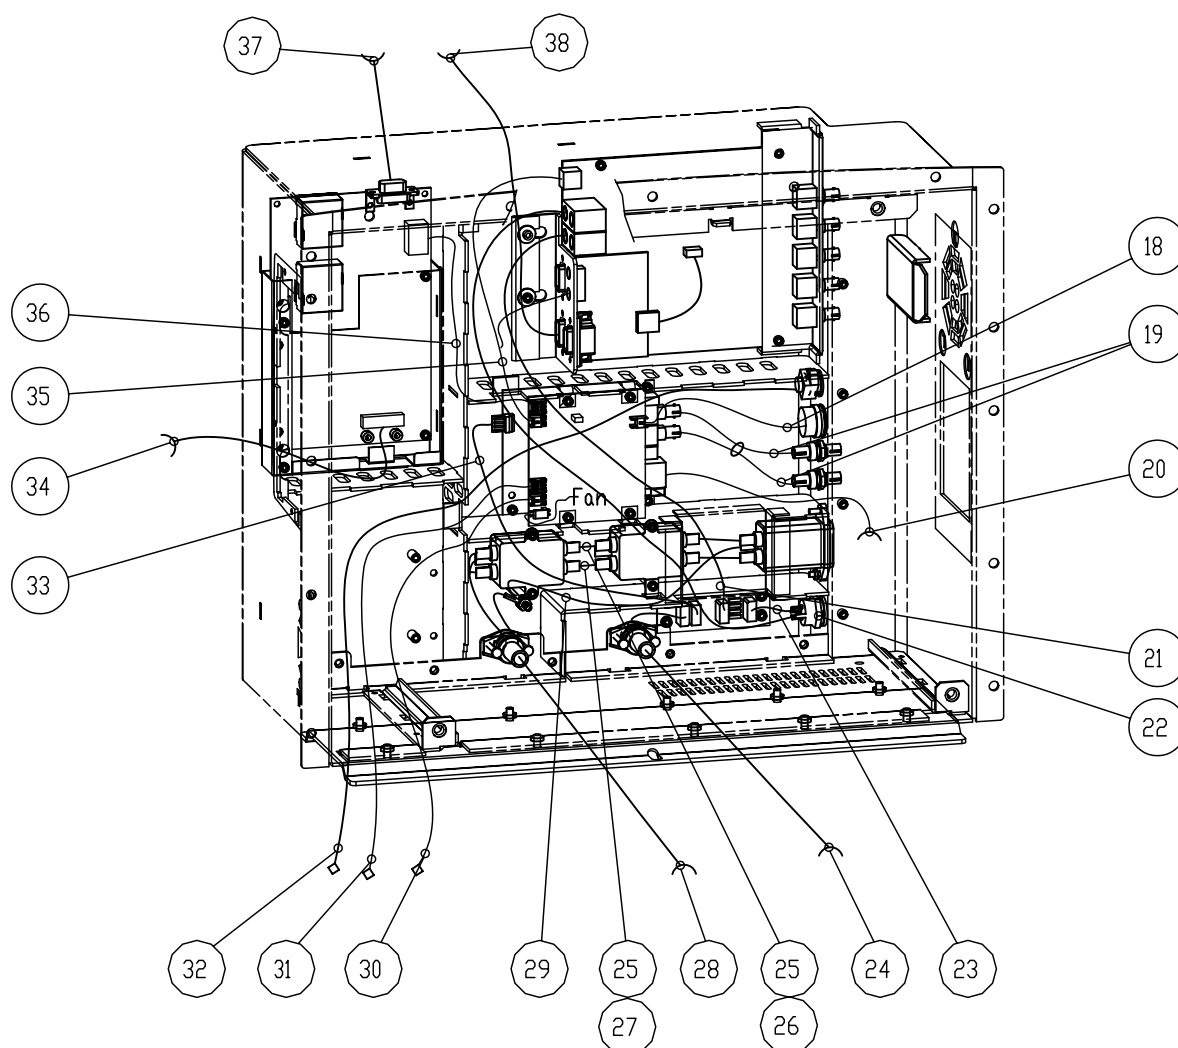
Exploded view of the MRI Shield, Back shell, Cables
